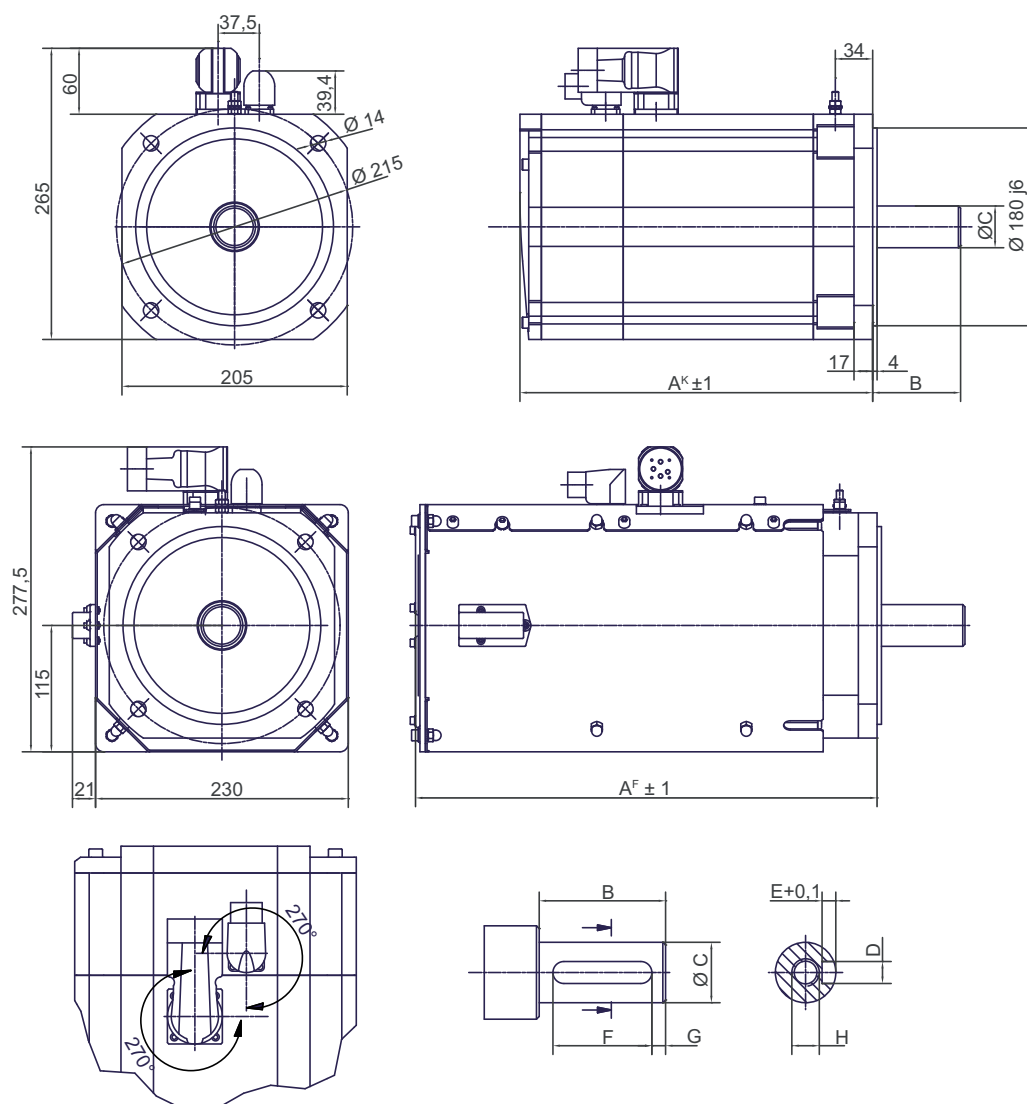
Dimensional drawing - SH 205 with connector variant
